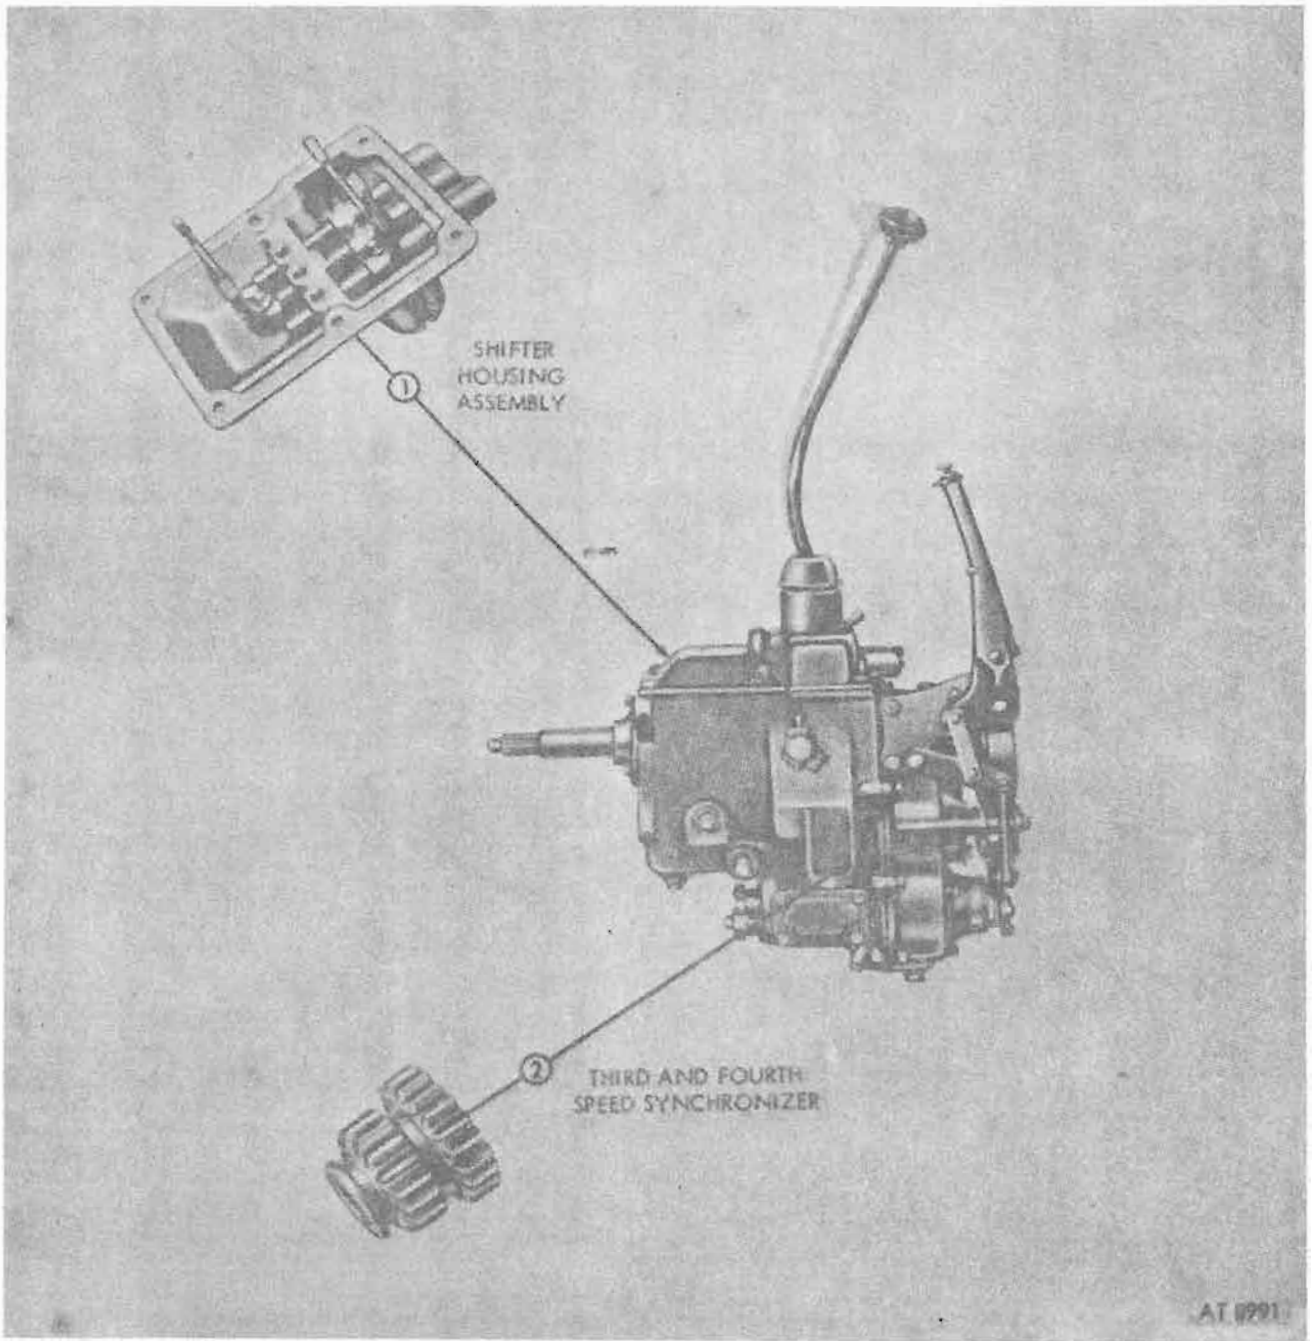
Gearshift lever stuck in third or fourth gear.
